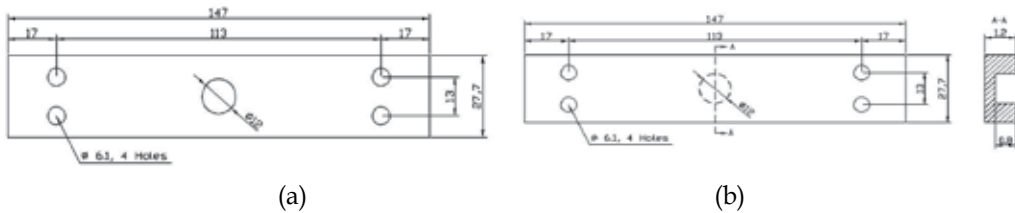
Dimensions of specimens used in-plane displacement (unit : mm) (a) rectangular steel plate with through-thickness circular hole (b) rectangular steel plate with partly through-thickness circular hole.
